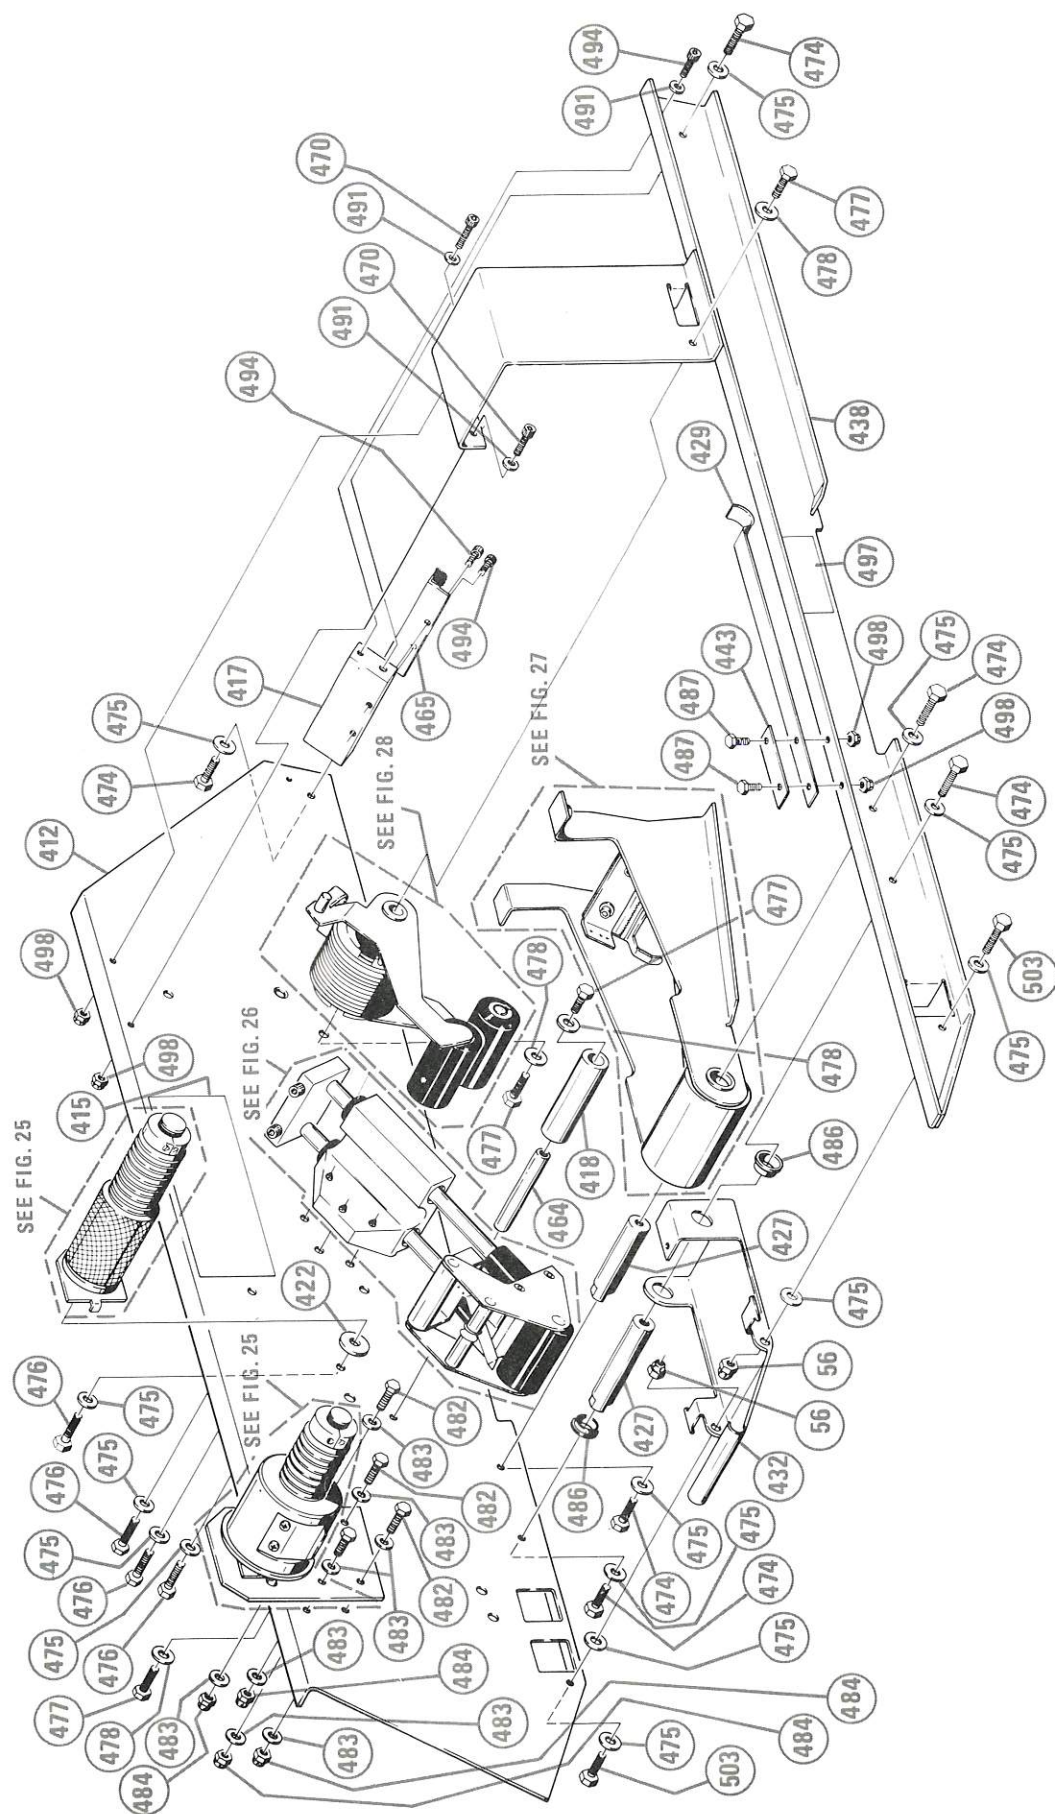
UPPER TAPING HEAD ASSEMBLY
